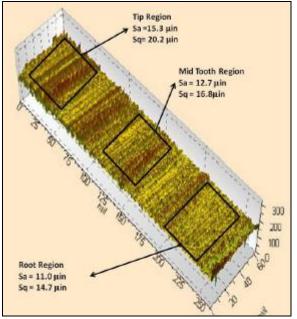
Surface Roughness and Topography of TTO Gear After 33.5 hrs of Testing
